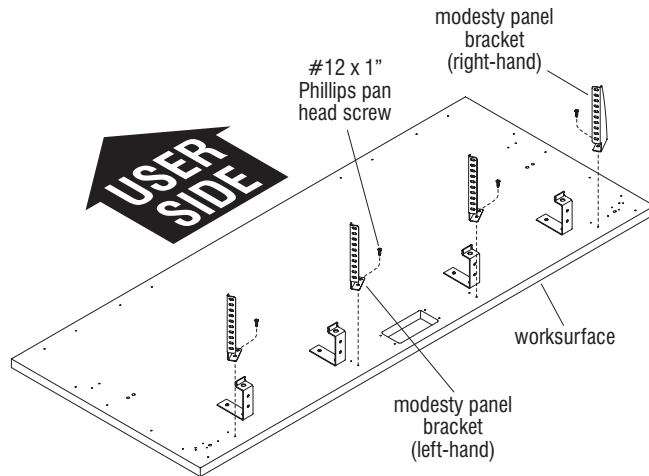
Single-Sided Fixed Benching with Hardwired Electrical & Modesty Panels
